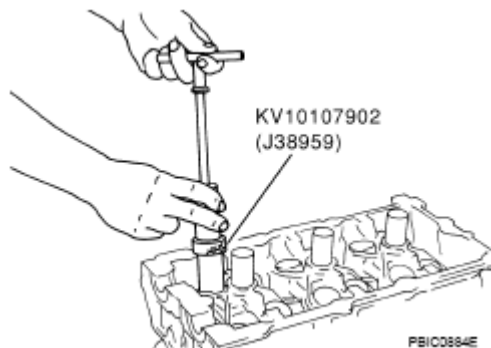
Removing Valve Oil Seal Using Valve Oil Seal Puller
